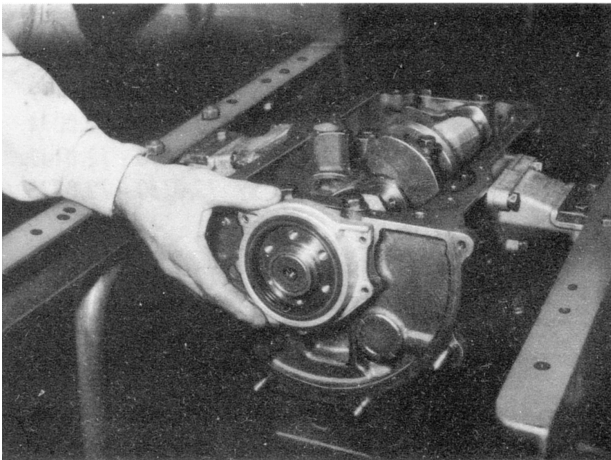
Removing the Sealing Shell of the Rear Bearing
